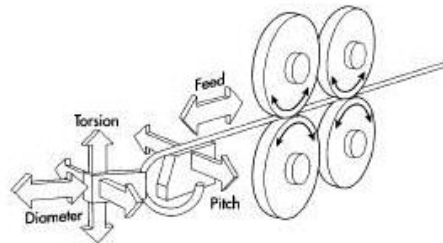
Schematic view of a cold drawing spring machine (madehow, 2016)
